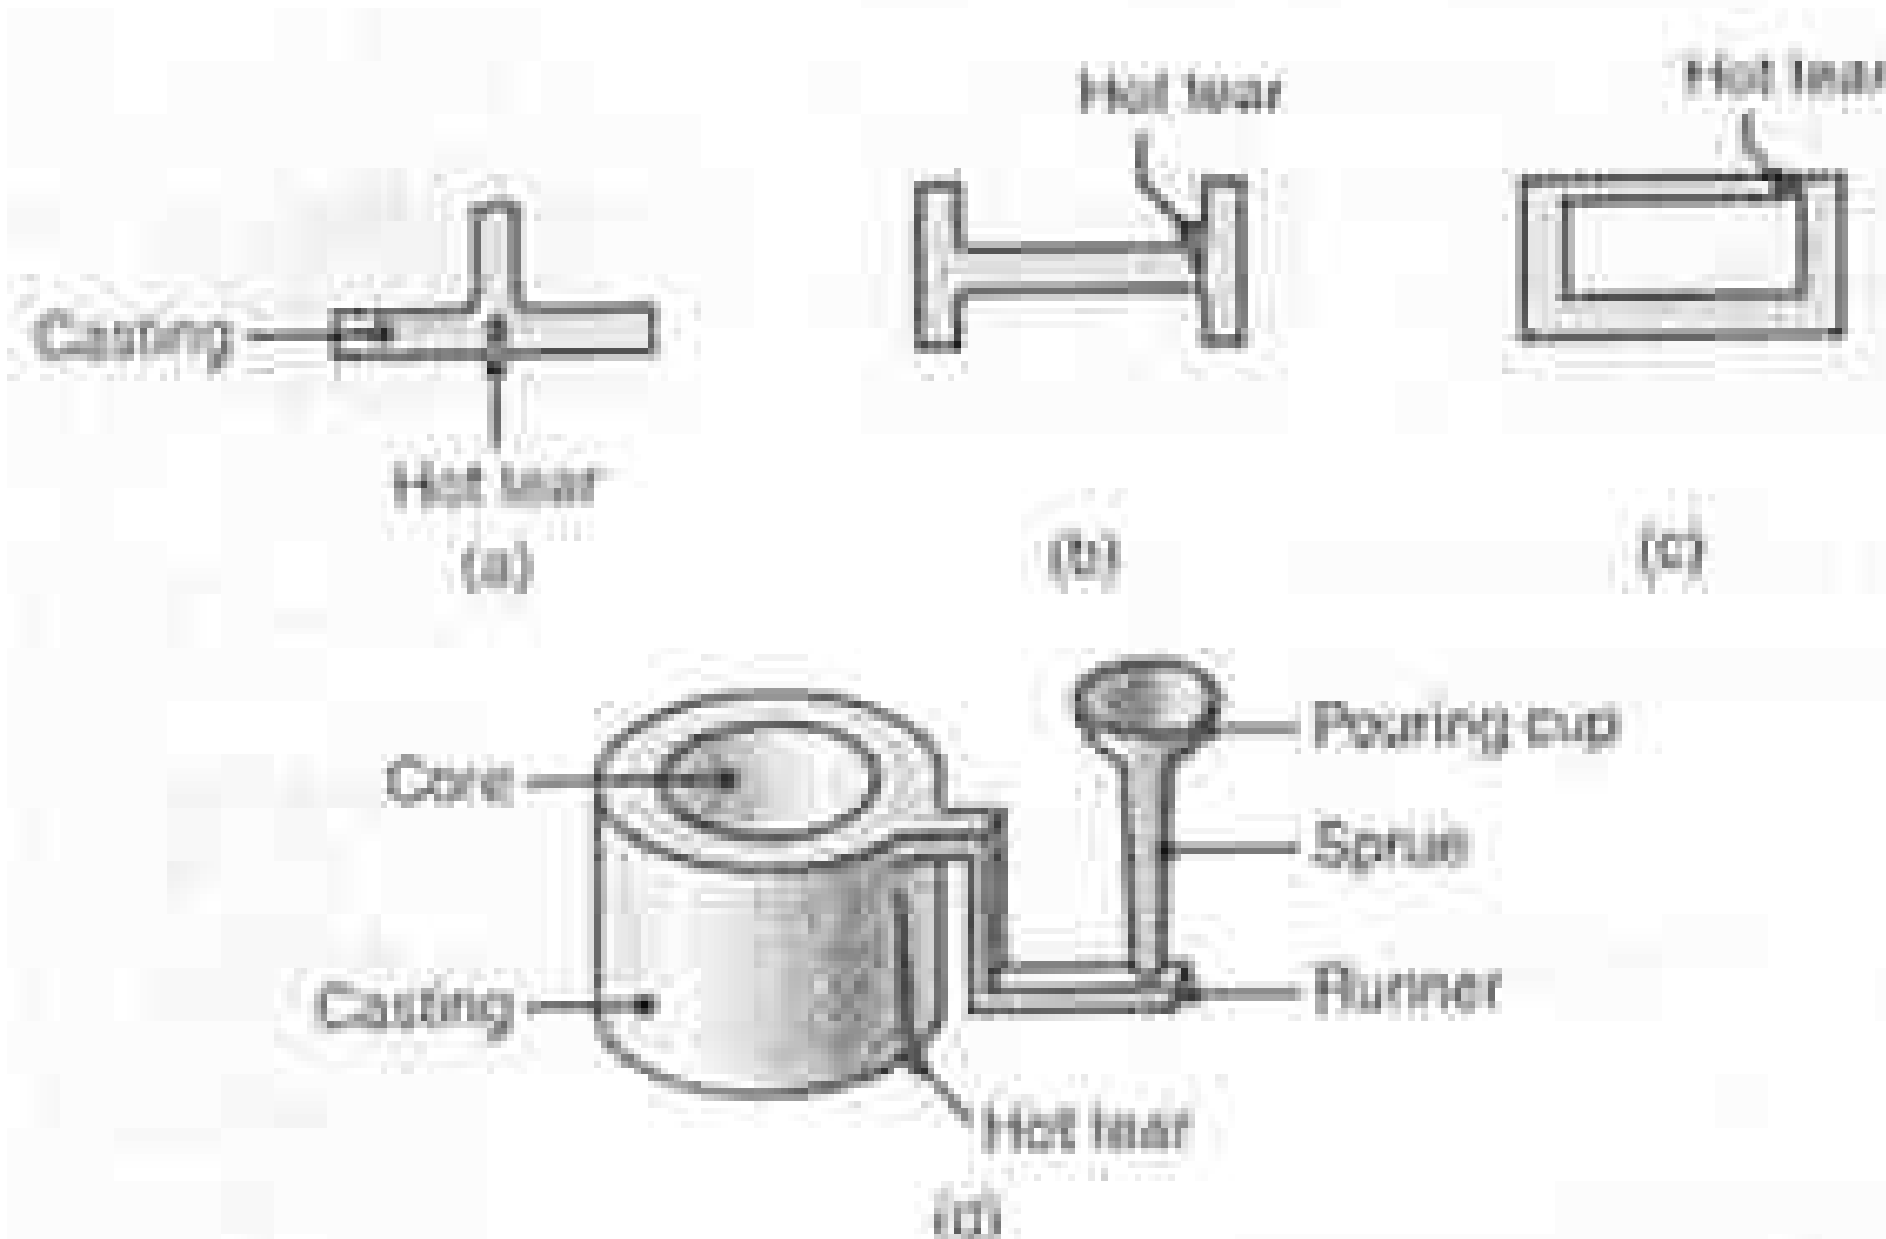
Examples of hot tears in castings. These defects occur because the casting cannot shrink freely during cooling, owing to constraints in various portions of the molds and cores. Exothermic (heat-producing) compounds may be used (as exothermic padding) to control cooling at critical sections to avoid hot tearing.
